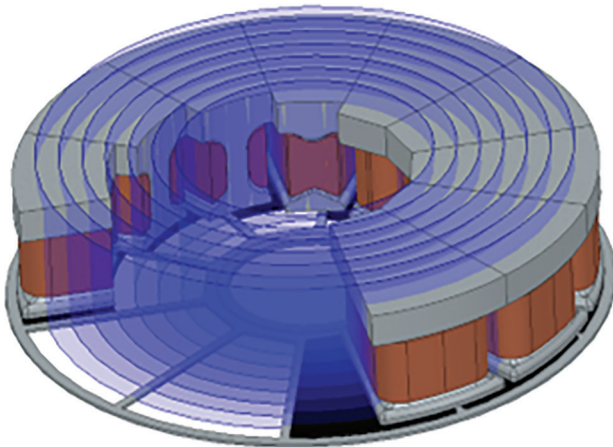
Lateral surface cuts in an I-type axial flux machine.
